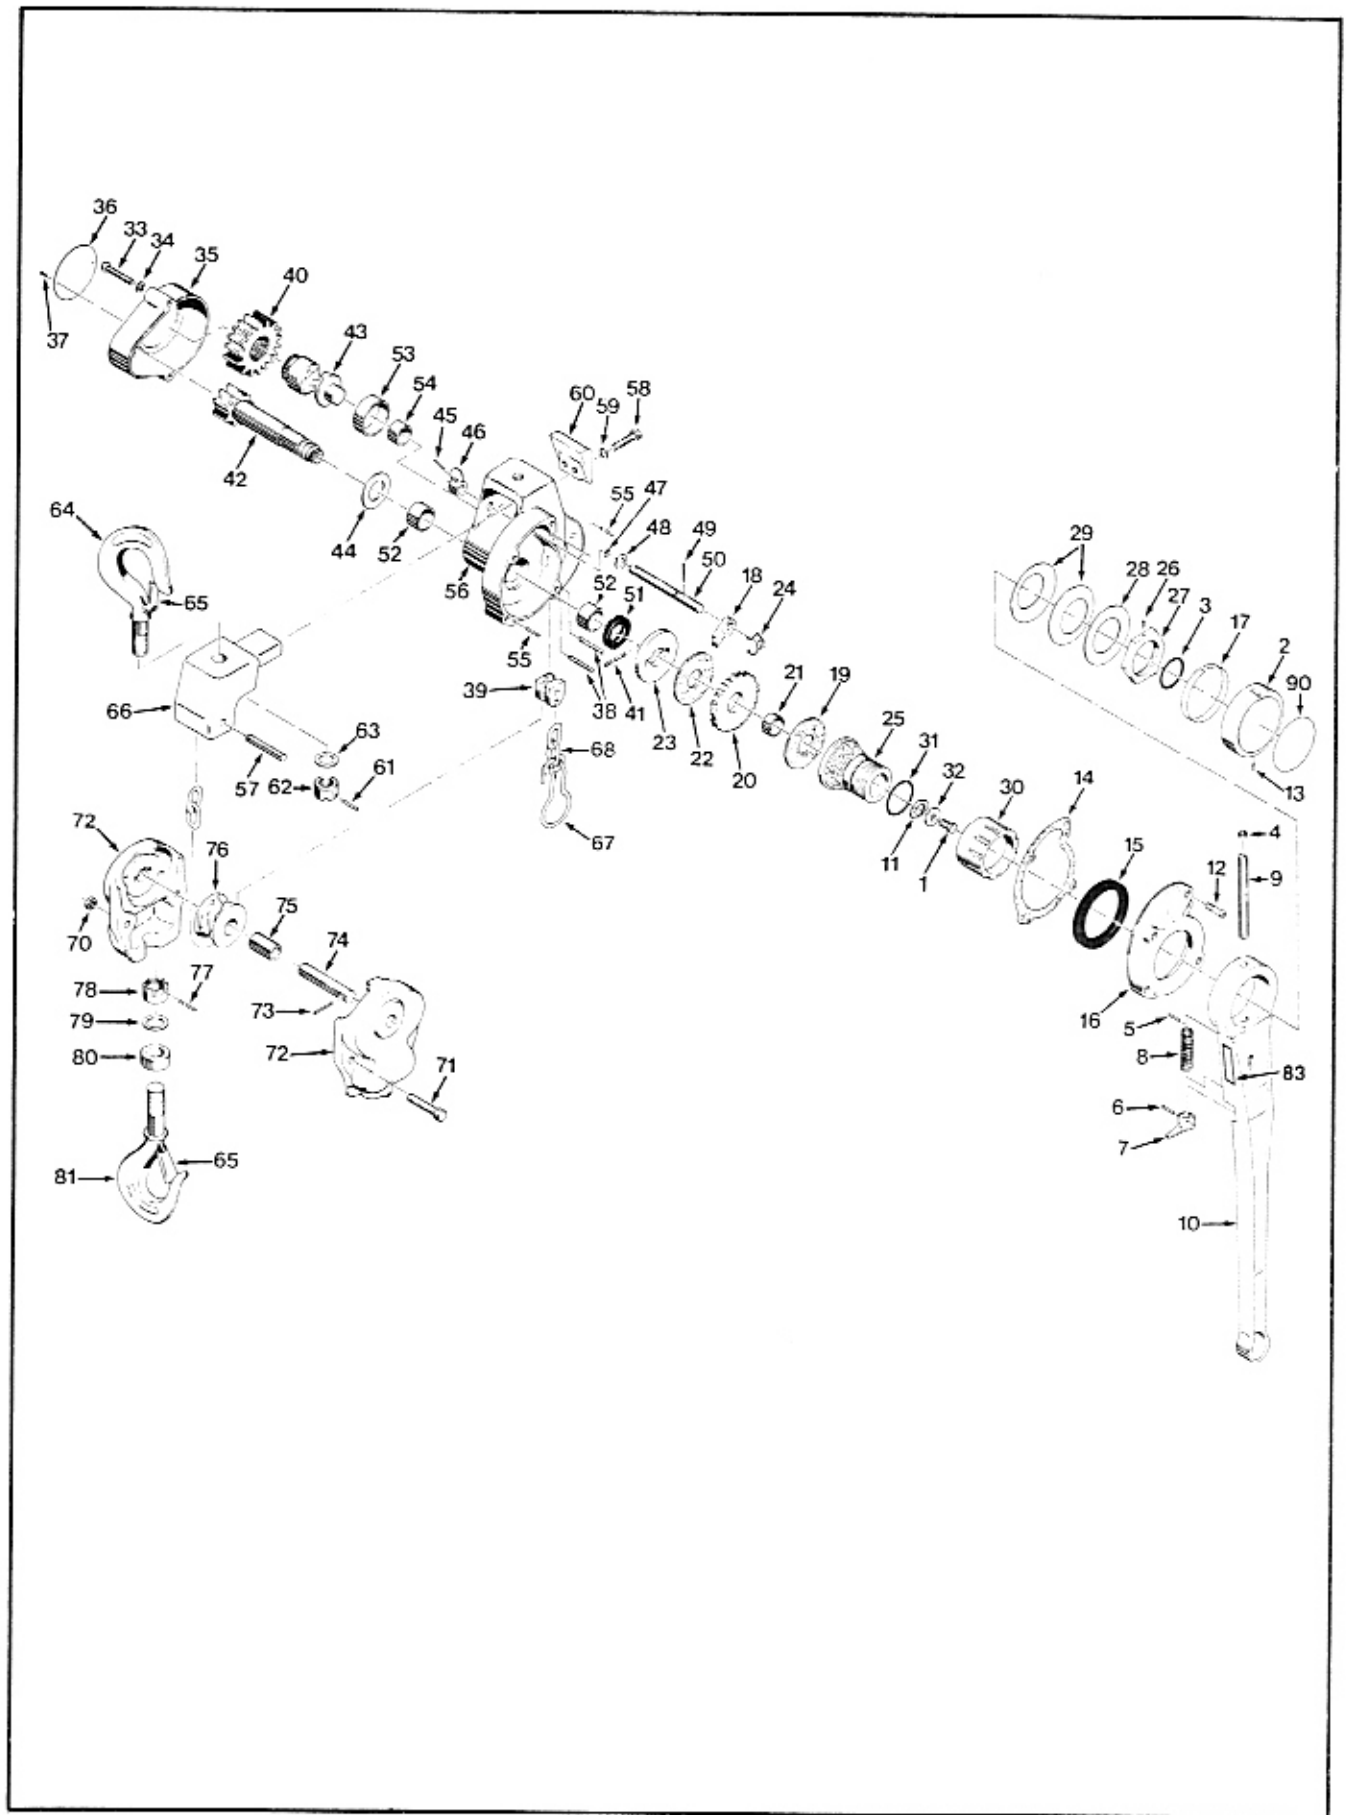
EXPLODED ILLUSTRATION OF MODEL MAL-30-2 HOIST
